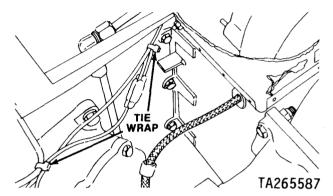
Removing or Installing Smoke and Dust Detector Electrical Cables
